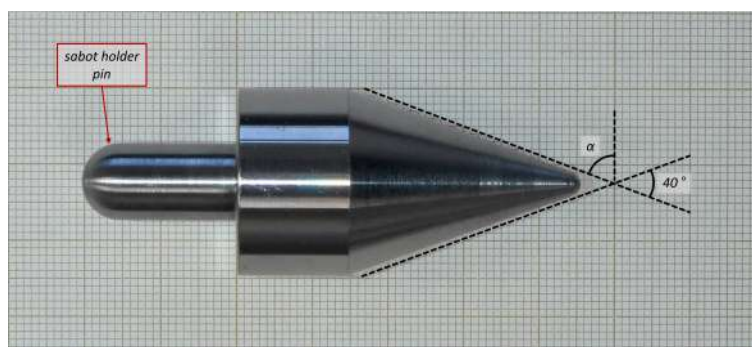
Cone-shaped 42CrMo4 steel projectile. Millimeter graph paper is used as a reference for the dimensions.
